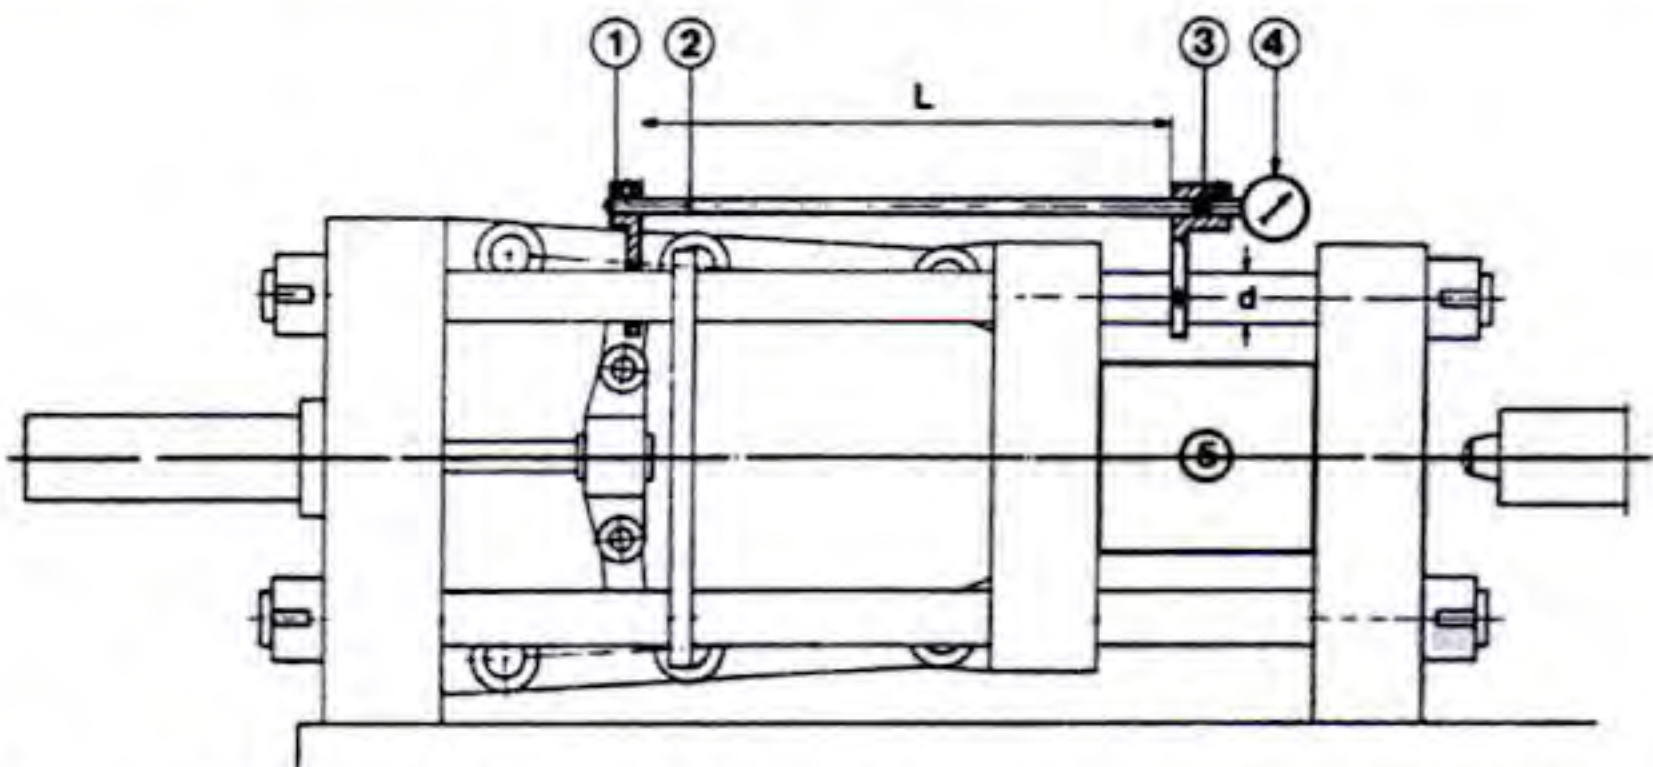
Mechanical device for measuring clamping force: (1) left-hand support, (2) rod, (3) right-hand support, (4) dial gauge, and (5) mold.
